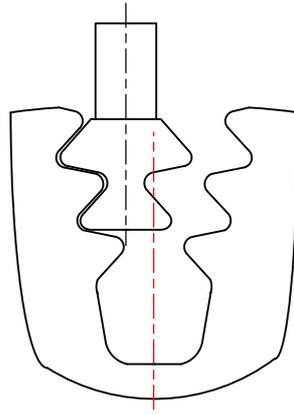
Experimental equipment for grinding turbine disk slots.
